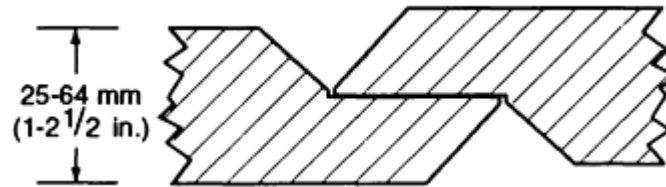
OFFSET DOUBLE-V JOINT CONFIGURATION USED TO WELD THICK SECTION ALUMINUM ARMOR PLATE
